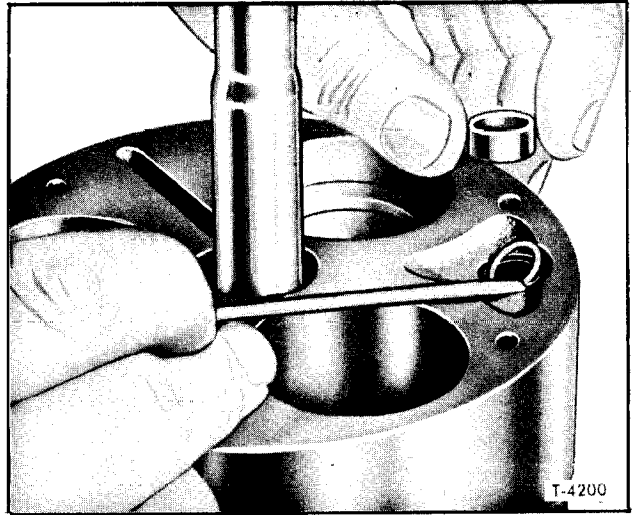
Installing Discharge Crossover Tube, Front O-Ring, and Spacer
